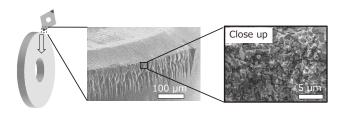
Typical failure of cutting edge after sintered alloy machining
